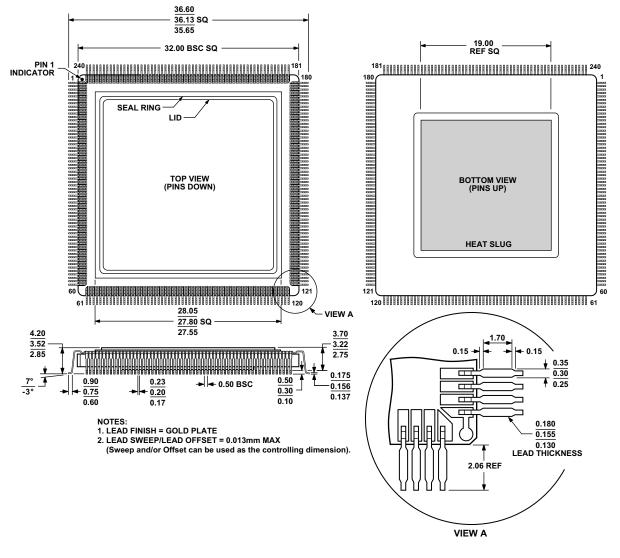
240-Lead Ceramic Quad Flat Package, Heat Slug Down [CQFP] (QS-240-1A) Dimensions shown in millimeters
